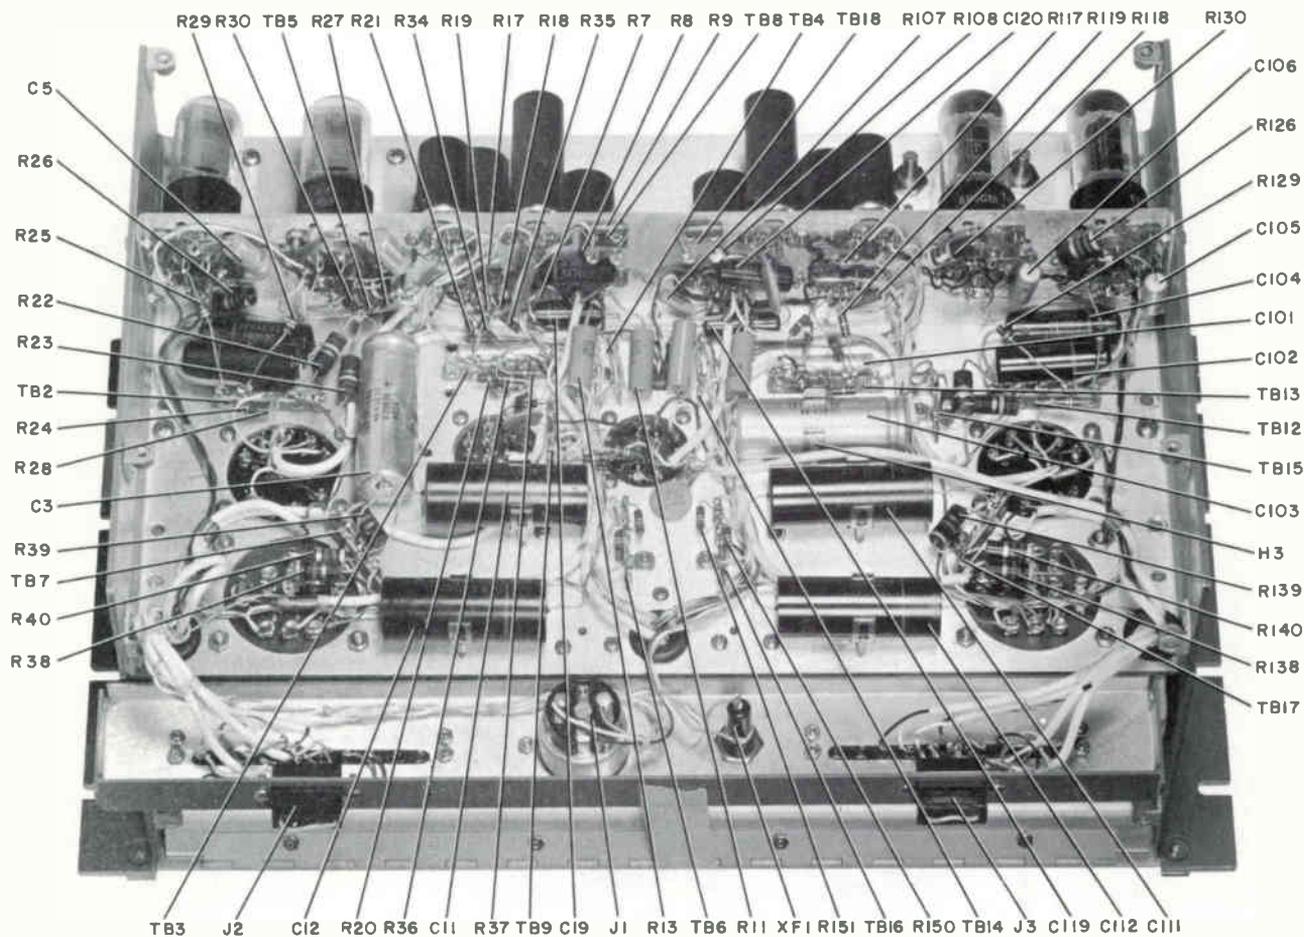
26U-2 Stereo Peak Limiter, Inside Rear View with Terminal Panel Lowered
